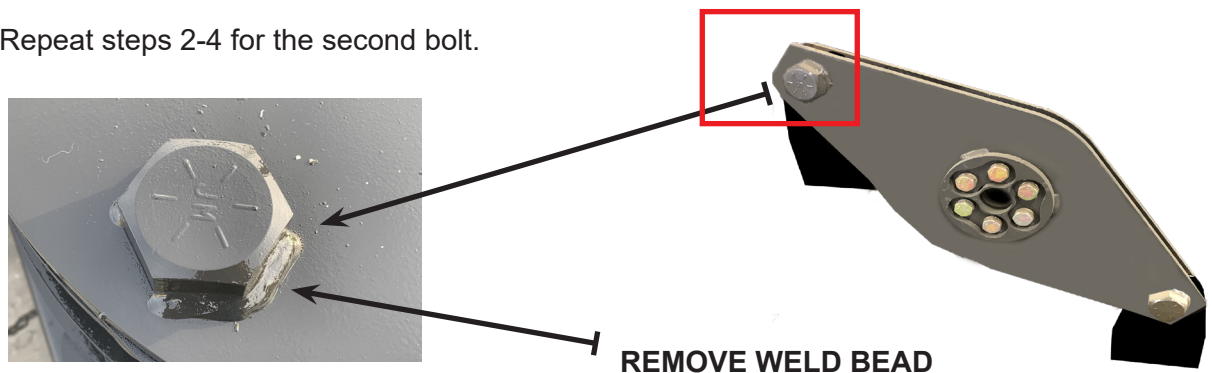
Blade Holder Bolt Weld Bead Removal
